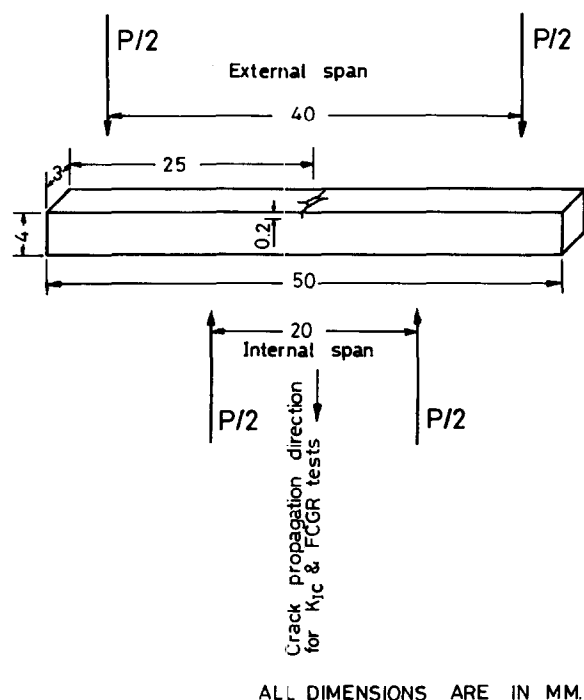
Indented and precracked specimen for four point bend loading. Cracks are located at the four corners of indentation.
